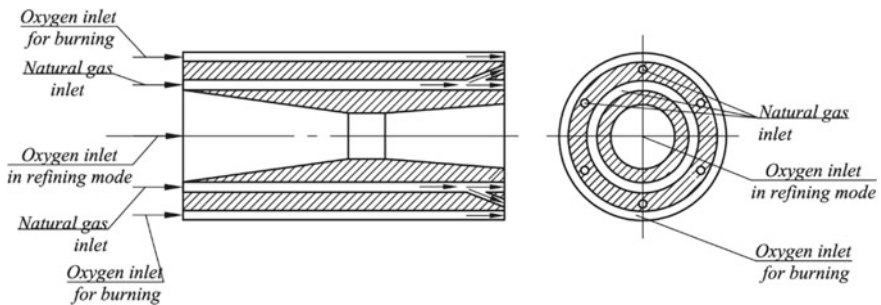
Design of VAI FUCHS 3.5 MW heat power gas-oxygen burner for arc steel furnaces
